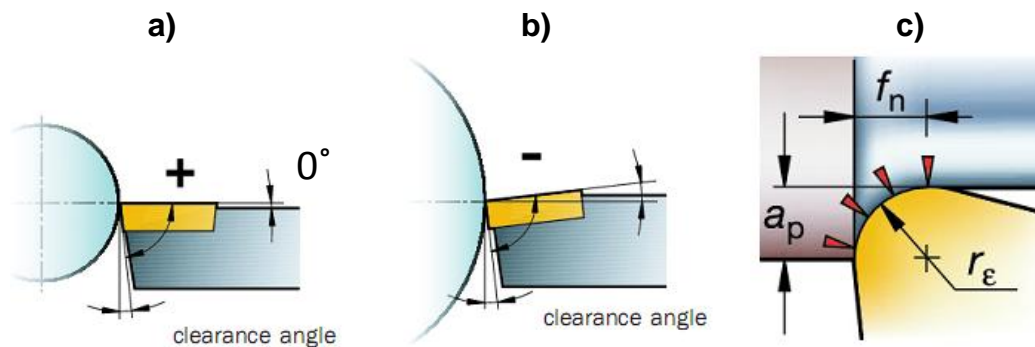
Clearance angle for a) positive insert b) negative insert. Note that the negative insert by itself has no clearance angle. In this case it is provided by the tool holder, which also introduces a negative rake angle. c) Schematic drawing of the nose radius (r_ϵ), feed (f_n) and cutting depth (a_p). [13].
